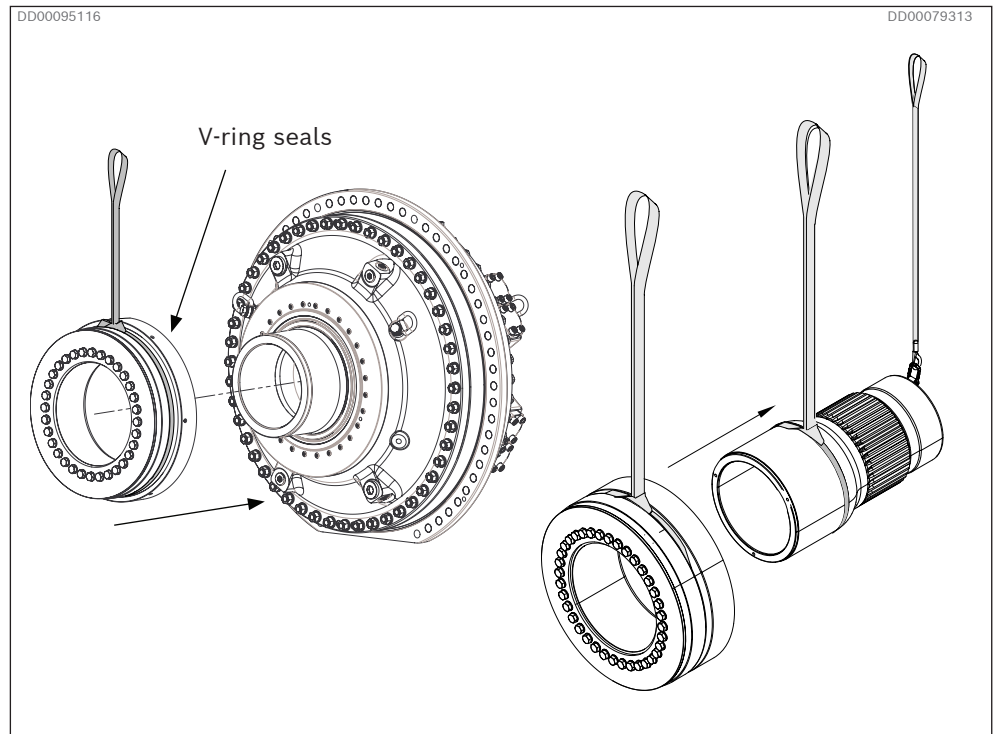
Mounting of shrink disc to adapter shaft or coupling motor
